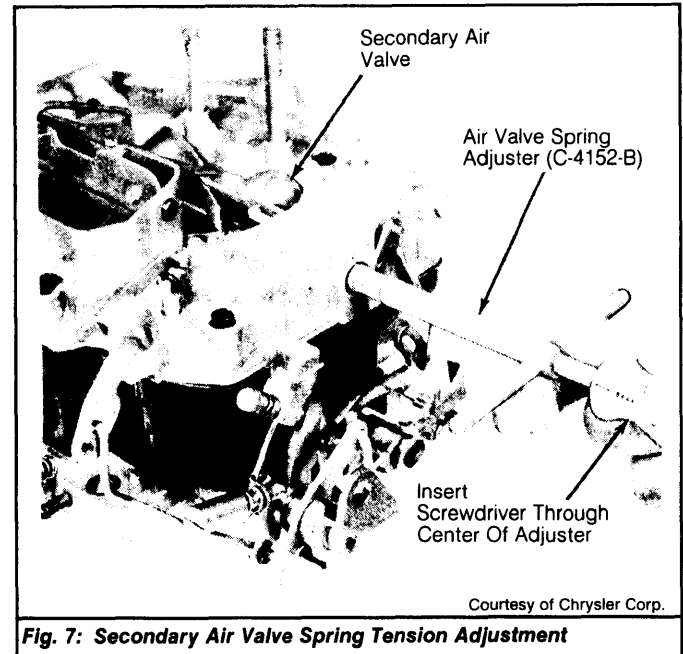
Secondary Air Valve Spring Tension Adjustment
